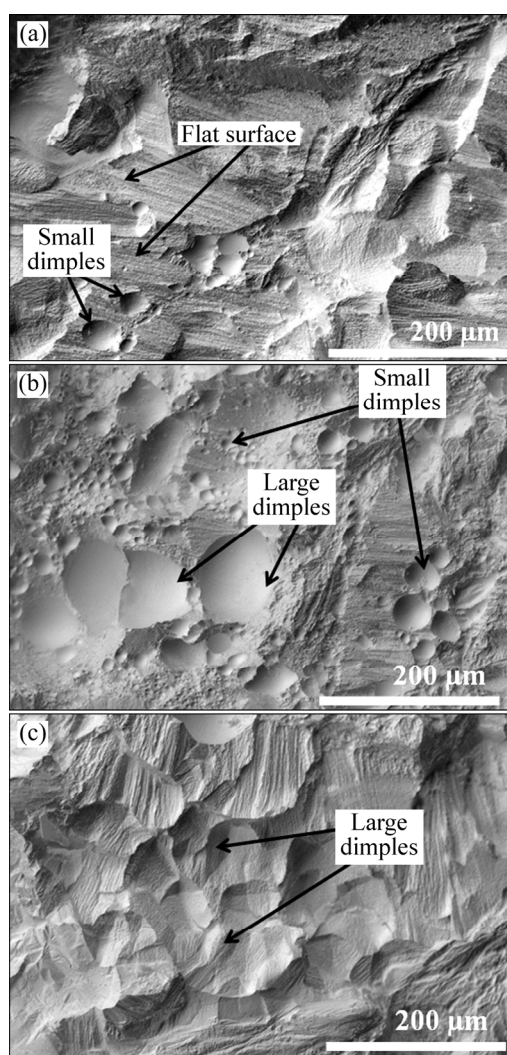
SEM micrographs showing fracture surface after tensile test: (a) Weld sample 4; (b) Weld sample 9; (c) As-received base metal
